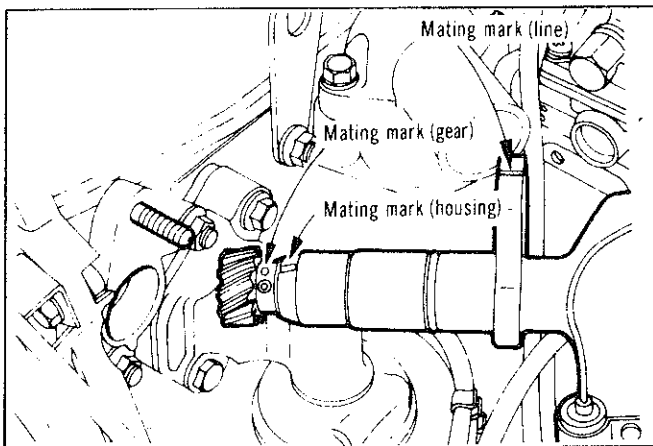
Distributor alignment marks (belt drive camshaft engine)
